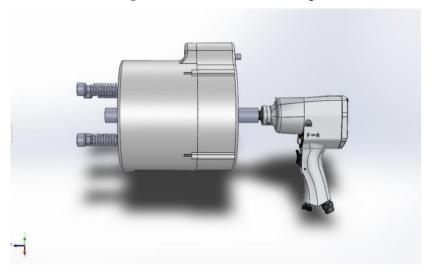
Side View of Mechanism Showing Casing and Pneumatic Power Driven Hand Gun
